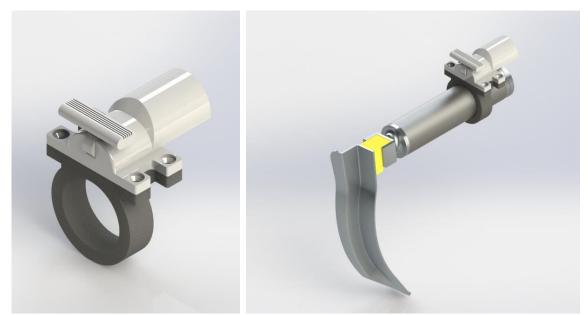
Re-Designed Controller Adaptor (Left), Re-Designed Controller Adaptor Attached To Laryngoscope (Right)
